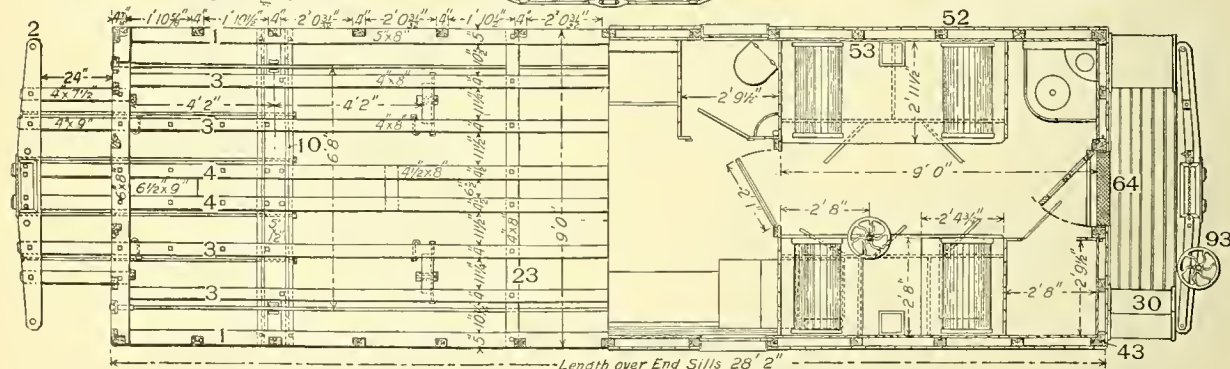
Half Plan of Underframe and Half Plan of Floor.
